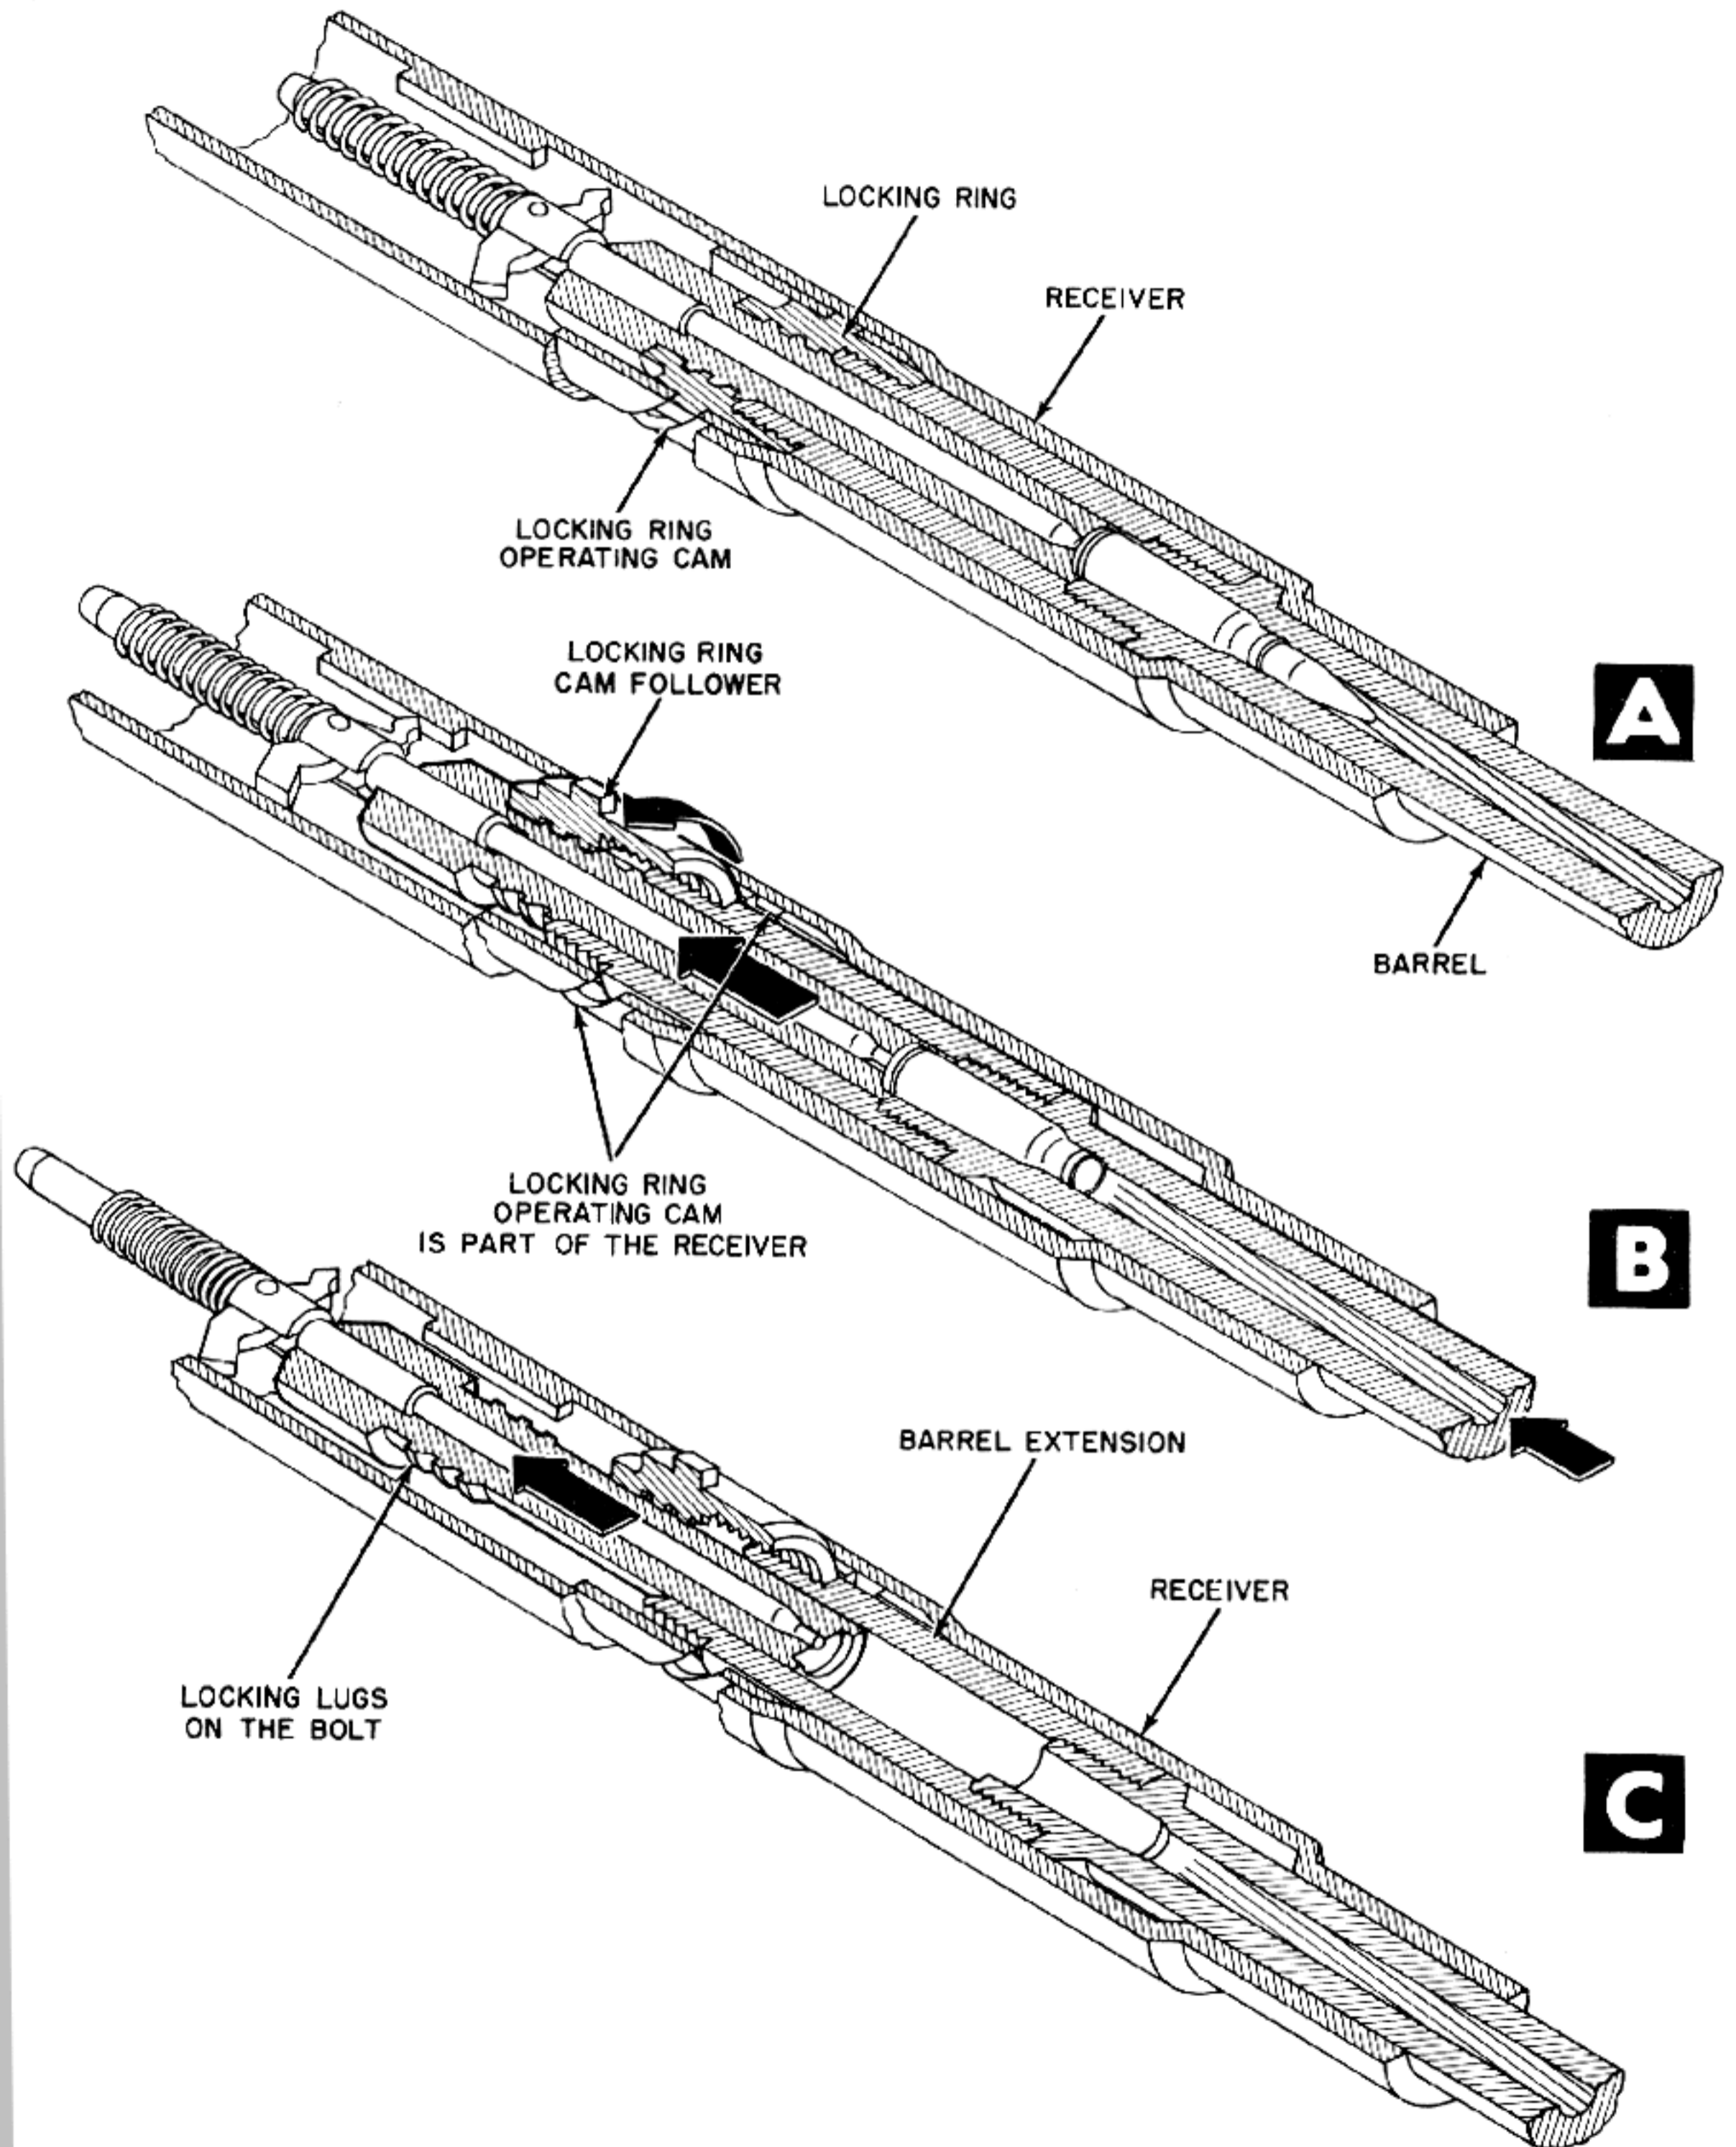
Cam Groove in Receiver Causes Locking Sleeve To Rotate, Unlocking the Bolt.
